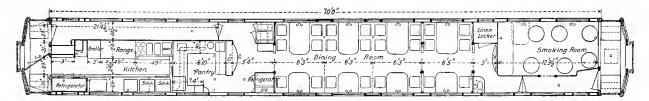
Floor Plan of Wabash Dining Car. Builder, American Car & Foundry Company.
